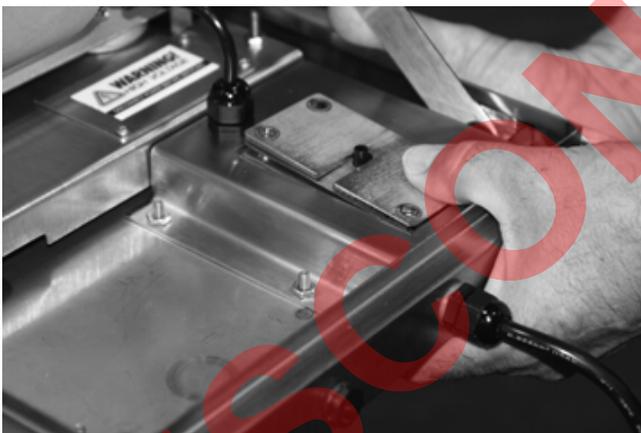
Remove the Component Parts of the Split Communications Cable Assembly
